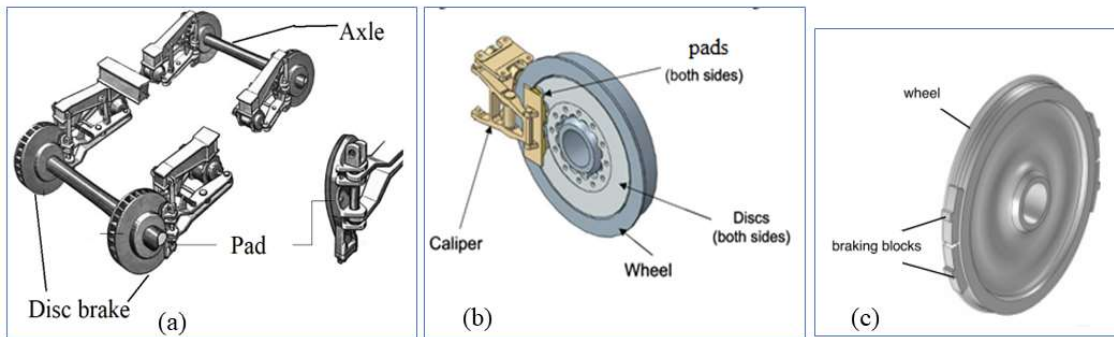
(a) axle mount disc [5], (b) wheel mount disc [48], (c) Tread/block brake [49]
